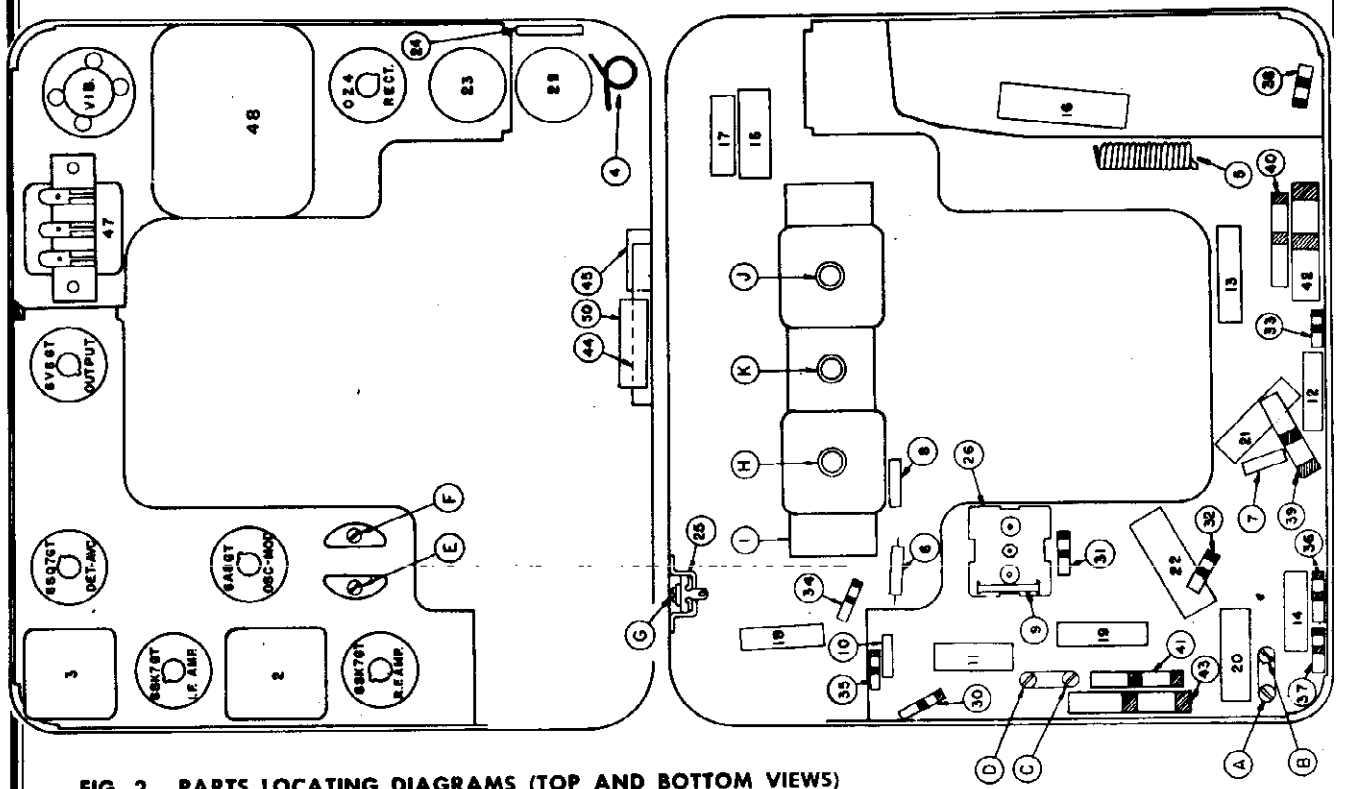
PARTS LOCATING DIAGRAMS (TOP AND BOTTOM VIEWS)
